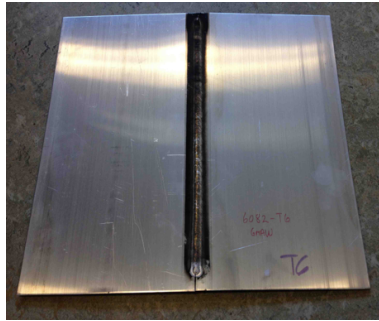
Photograph of the GMA welded sheets received from SINTEF.
